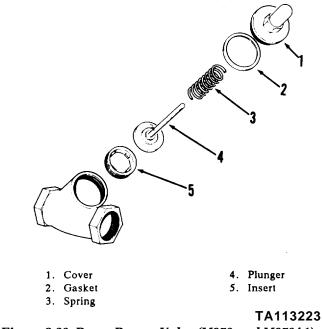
Pump Bypass Valve (M970 and M970A1).
